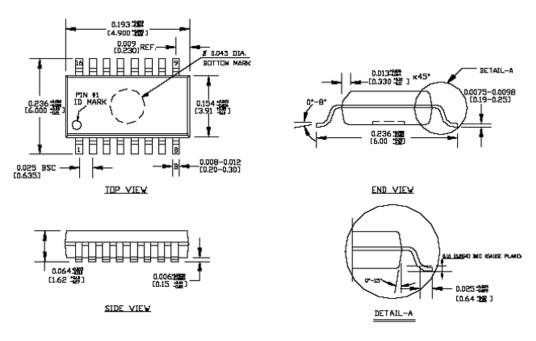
CY807 SSOP-16 Package Outline Dimensions shown in millimeters
